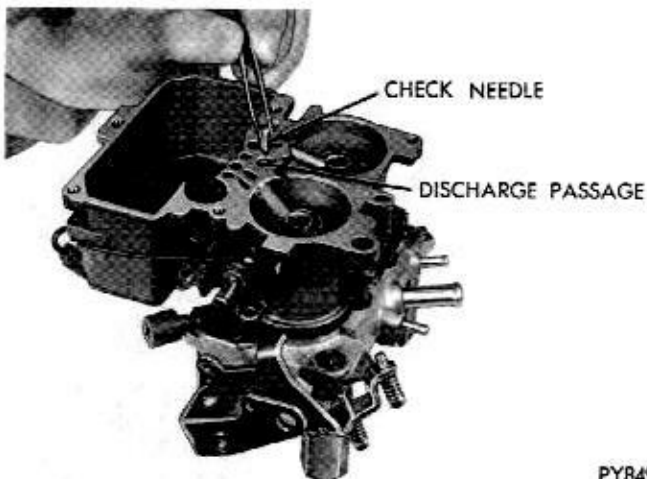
Installing Accelerator Pump Discharge Check Needle
